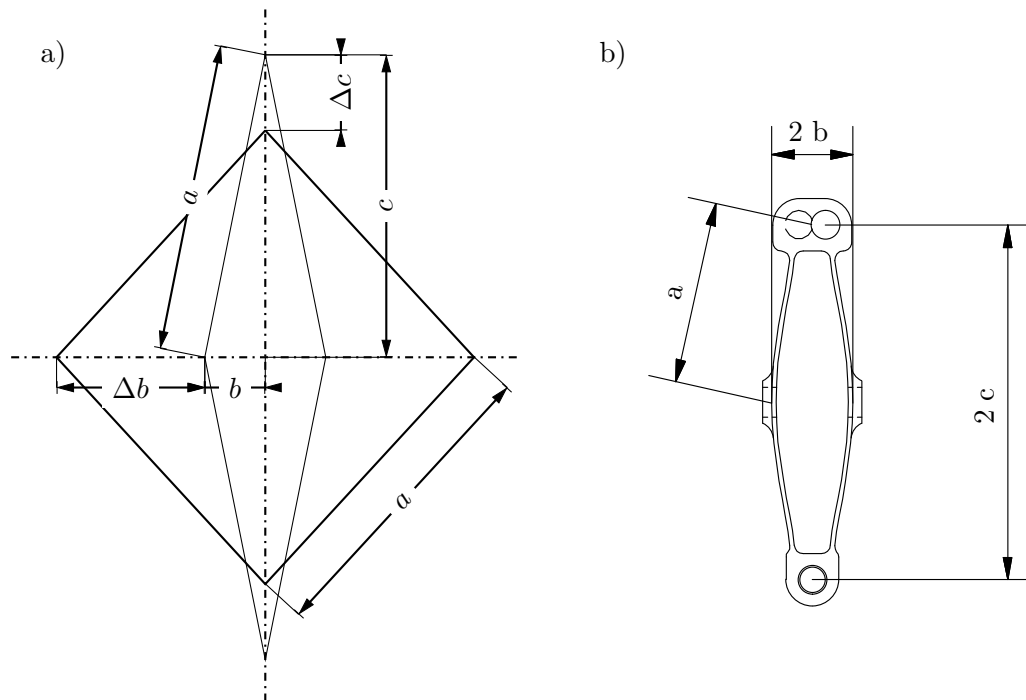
Scissor mechanism (gripper bias spring). a) Spring segment kinematic, undeformed (plain) and deformed (thick) b) CAD spring segment [12].
